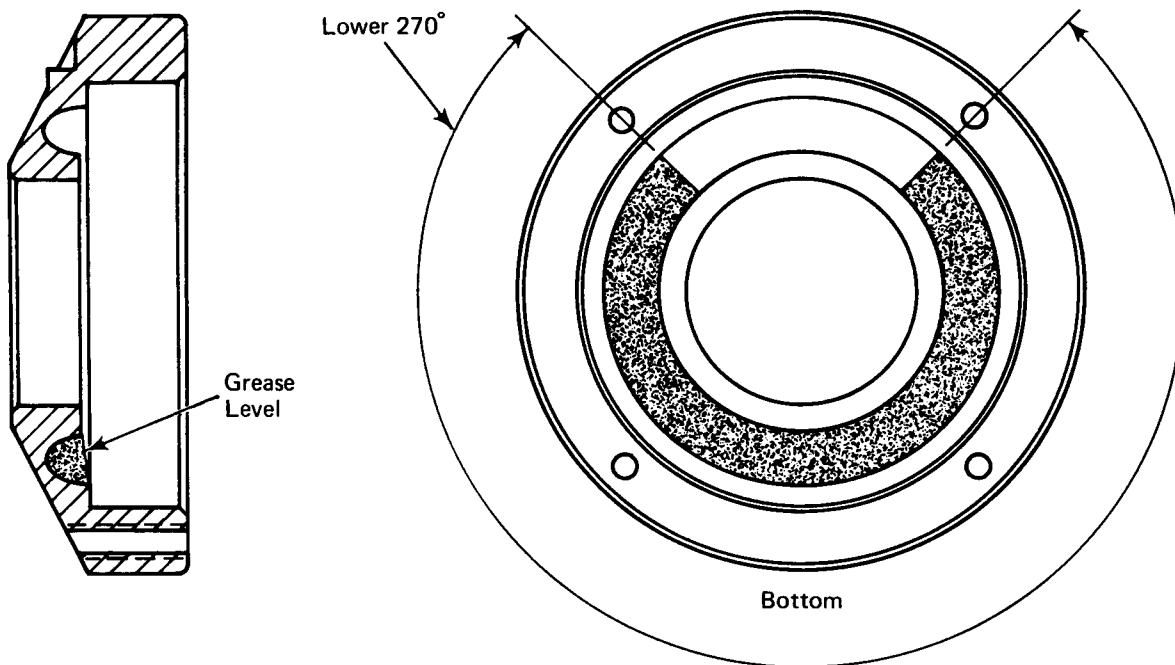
End Frame Grease Cavity, 18 And 24 kW Generators
